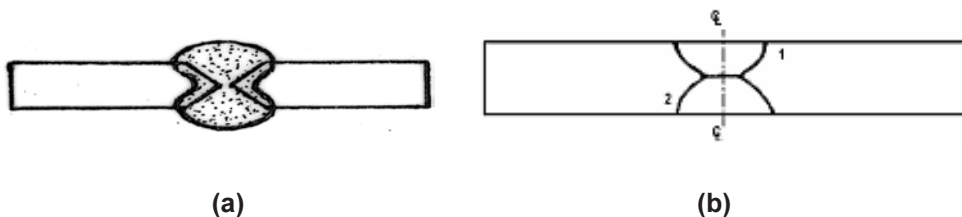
Butt Welds (a) double V groove (b) Square Butt Weld
